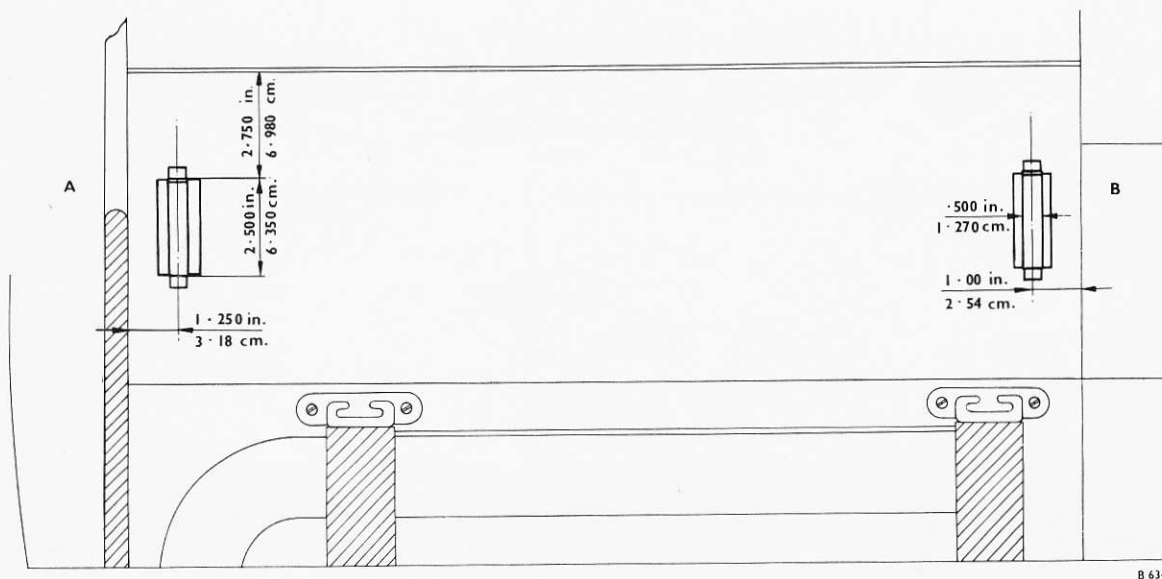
Dimension for cutting slots in sloping metal panel at the rear of the front seats — Long Wheelbase cars with division
